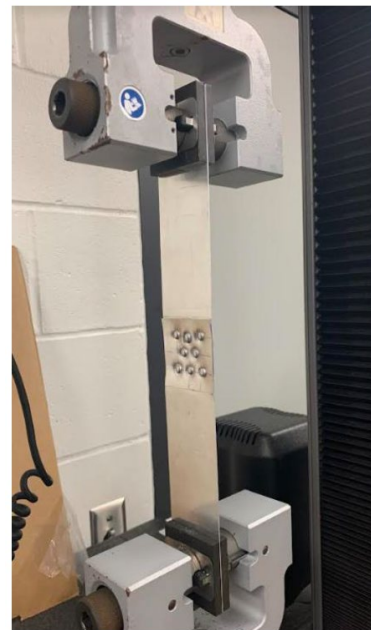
Angular view showing how should the riveted sample be fastened between the flat-end grips
